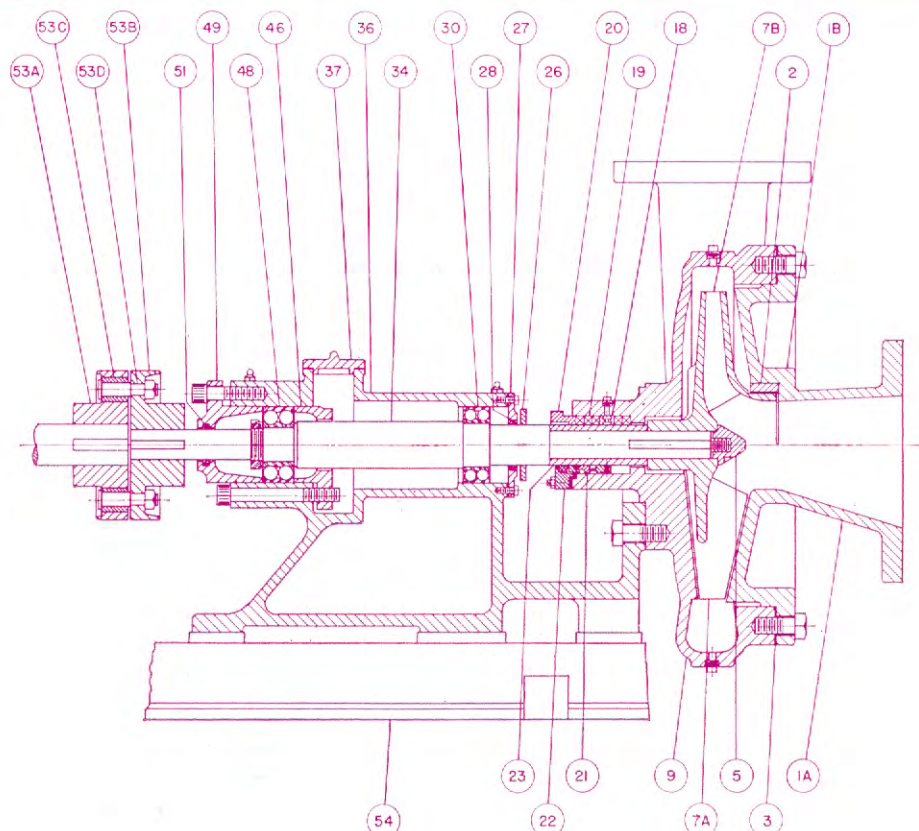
Cross section illustrates the construction of type "HBD" enclosed impeller pump.
